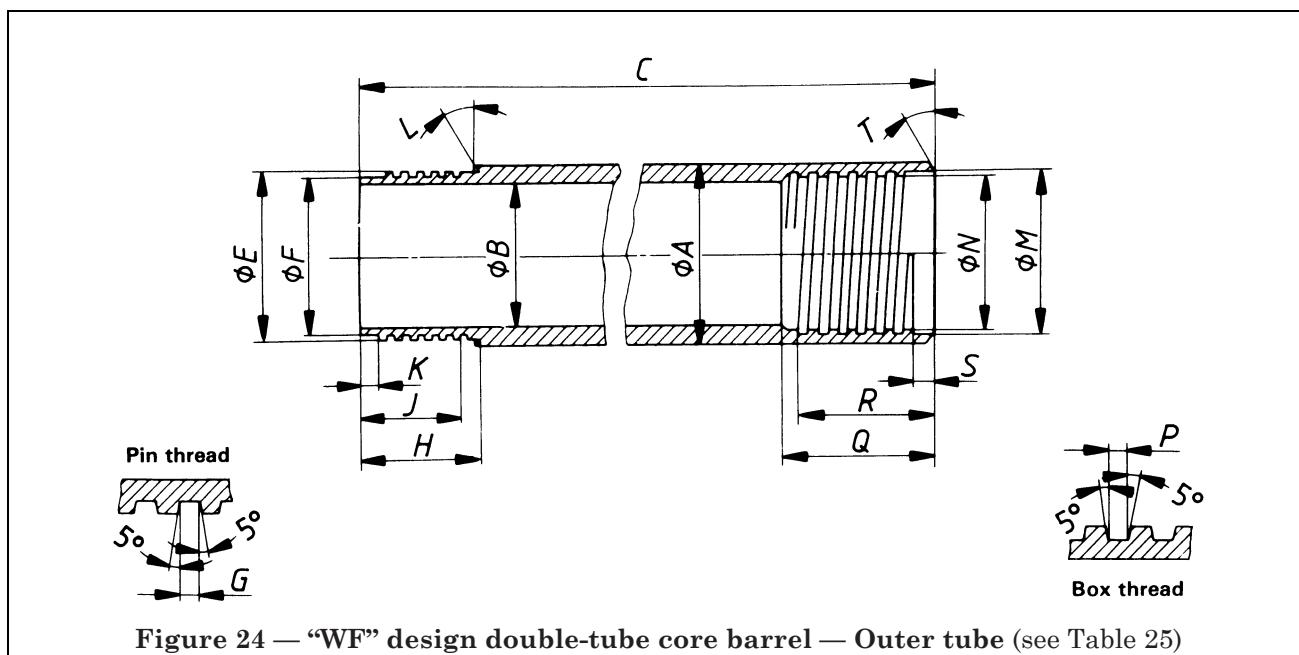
“WF” design double-tube core barrel — Outer tube (see Table 25)
